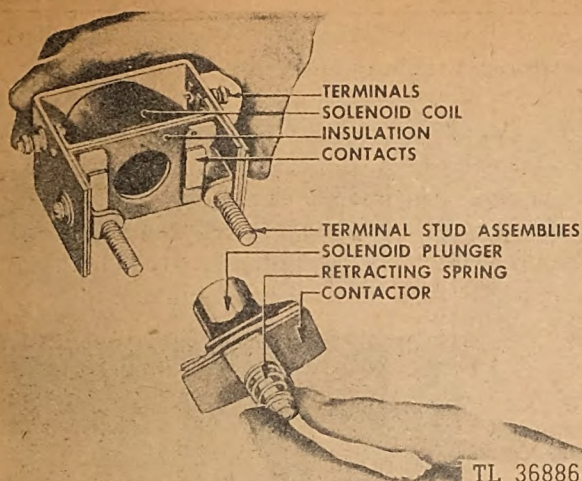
Removing or Installing Plunger and Contacts Assembly
